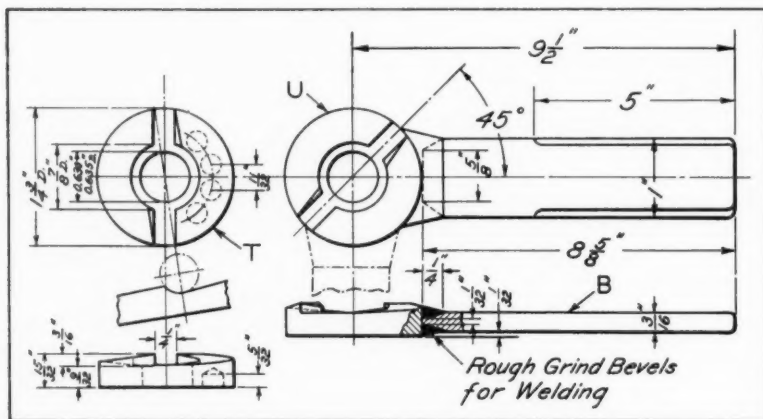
Quick-acting Clamping Cams Used on Stock Support
